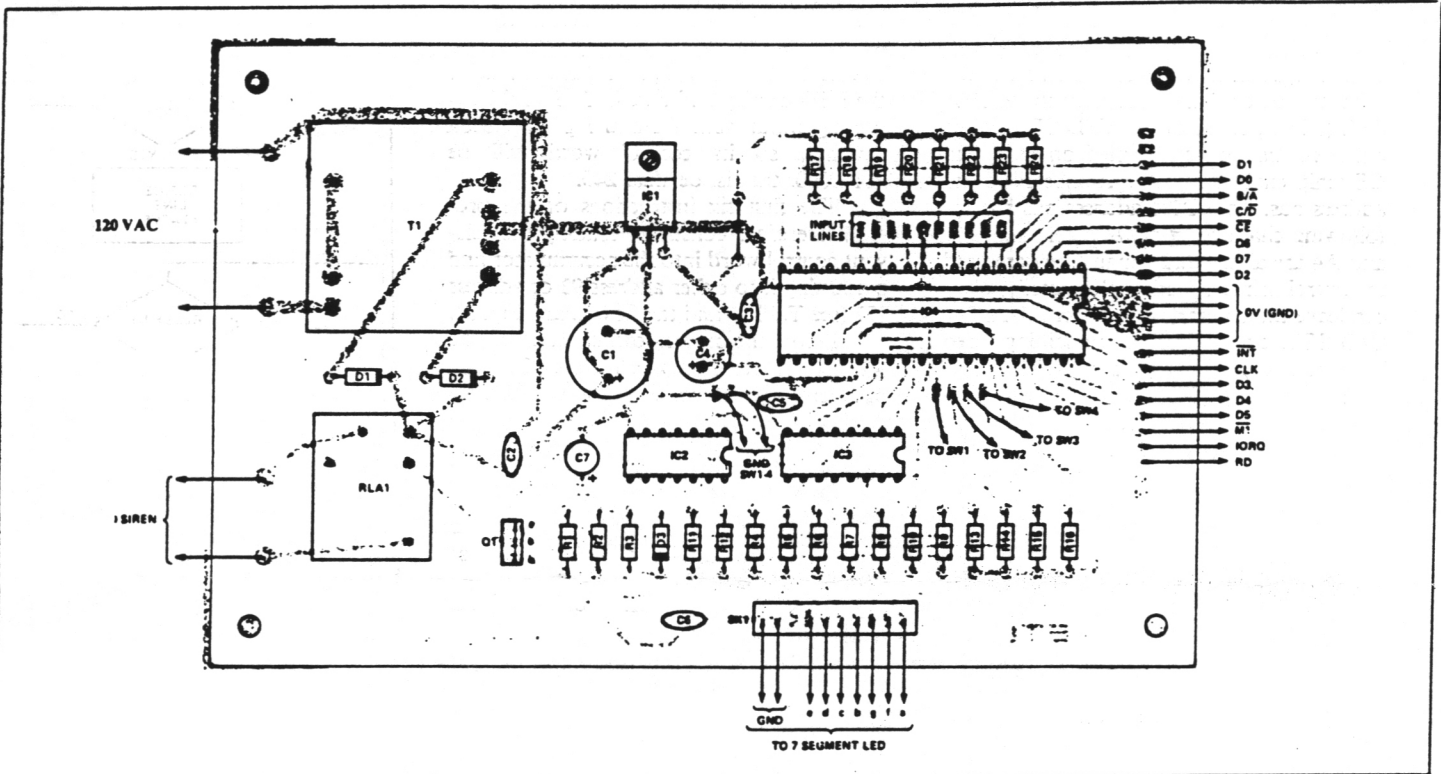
The overlay diagram for the PCB. Note: the circuit was originally designed for a PC-mounting transformer which may not be available. An ordinary transformer can be mounted off the board with the leads soldered to the PC pads.
